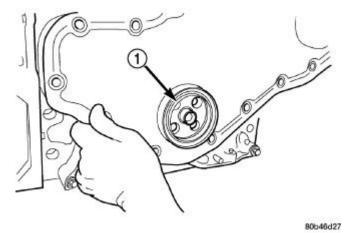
Installing Front Cover With Seal Pilot Courtesy of CHRYSLER GROUP, LLC
